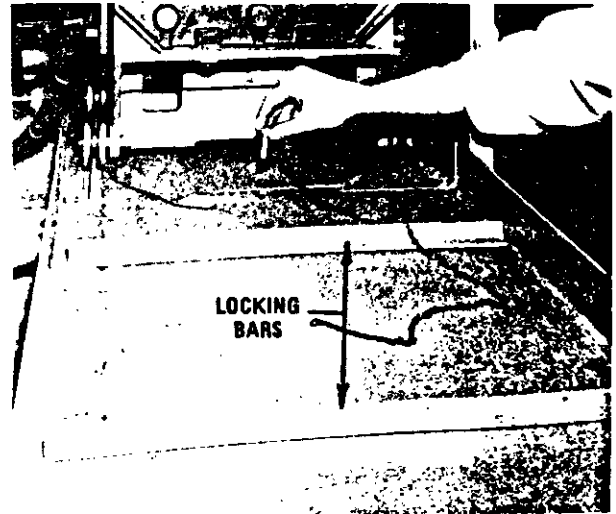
Locking pin holds dolly safely to controller frame. (Refer page 28)
